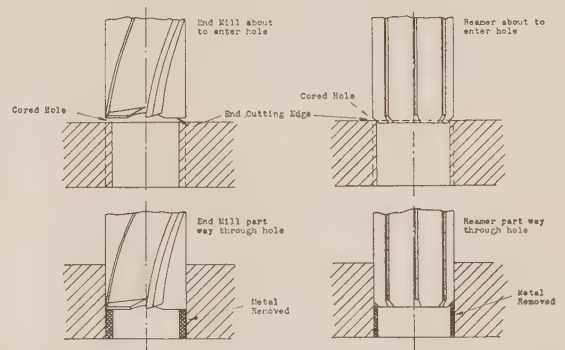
SIMILARITY OF CUTTING ACTION OF AN END MILL AND A MACHINE REAMER
